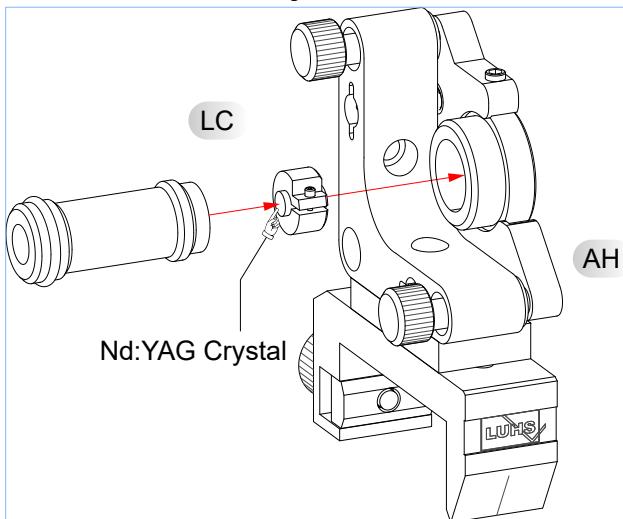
Laser mirror adjustment holder "left" with Nd:YAG rod (LC)
